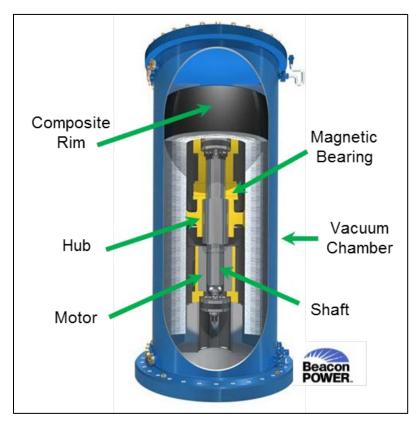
Integrated Flywheel System Package Cutaway Diagram (Courtesy Beacon Power)⁵
